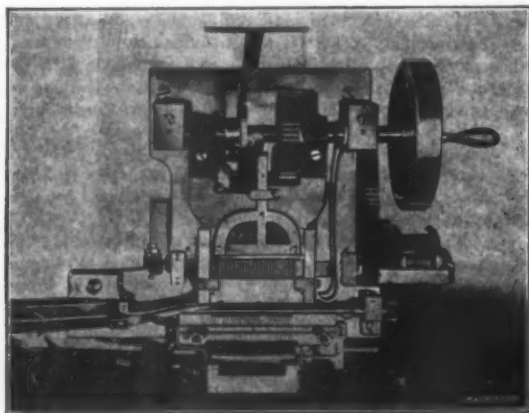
Top view of the principal part of the pin-sticking machine shown in Fig. 3.
